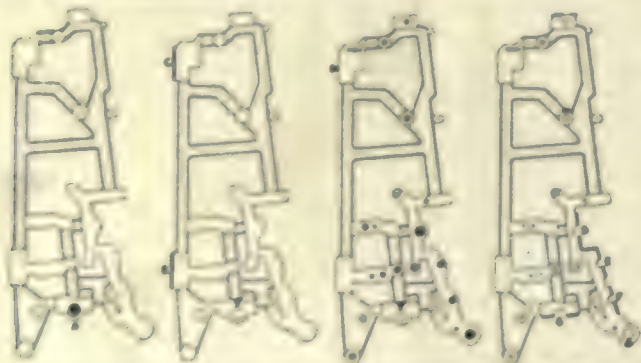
DIAGRAM OF MACHINING OPERATIONS
